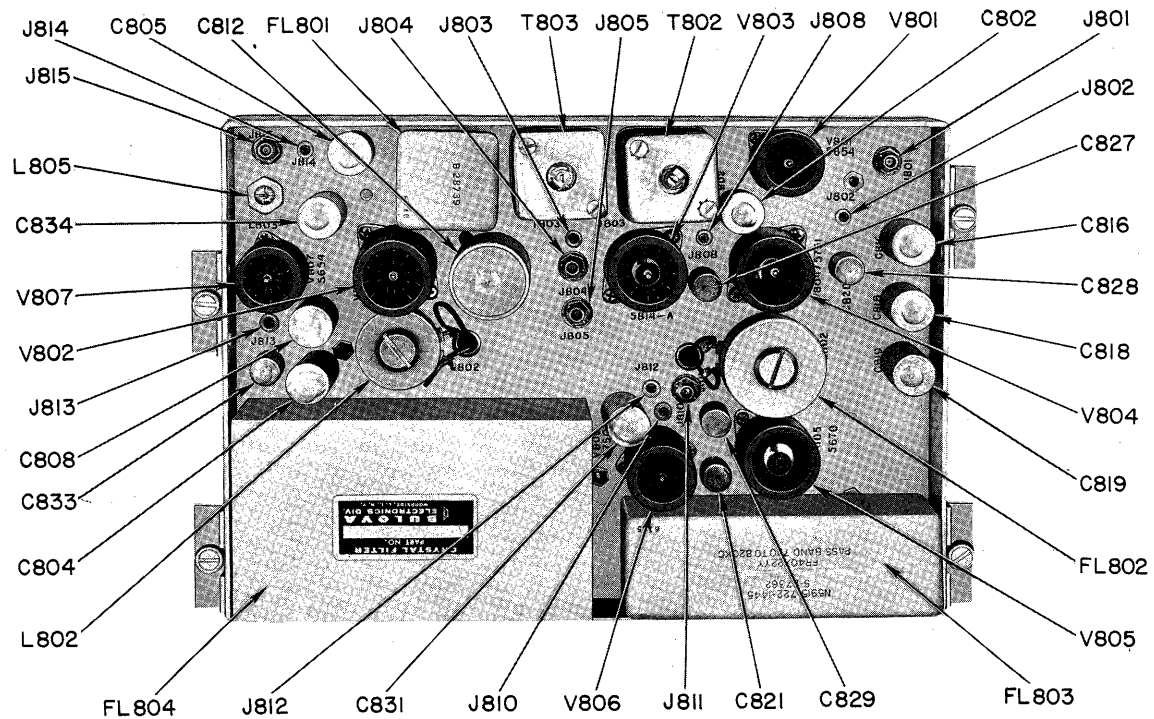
Synthesizer, Location of Parts (Sheet 1 of 2)
